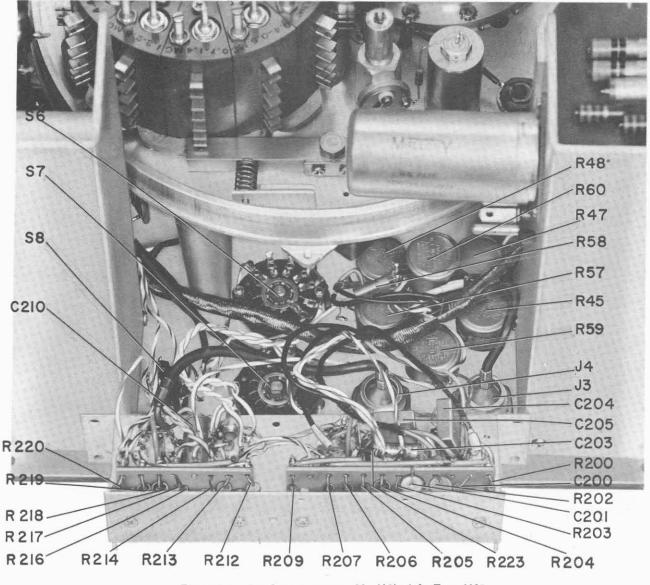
Display-output assembly (A2) of the Type 1025 demounted and folded out on its flexible connecting leads. Inter-circuit shield has been removed.
